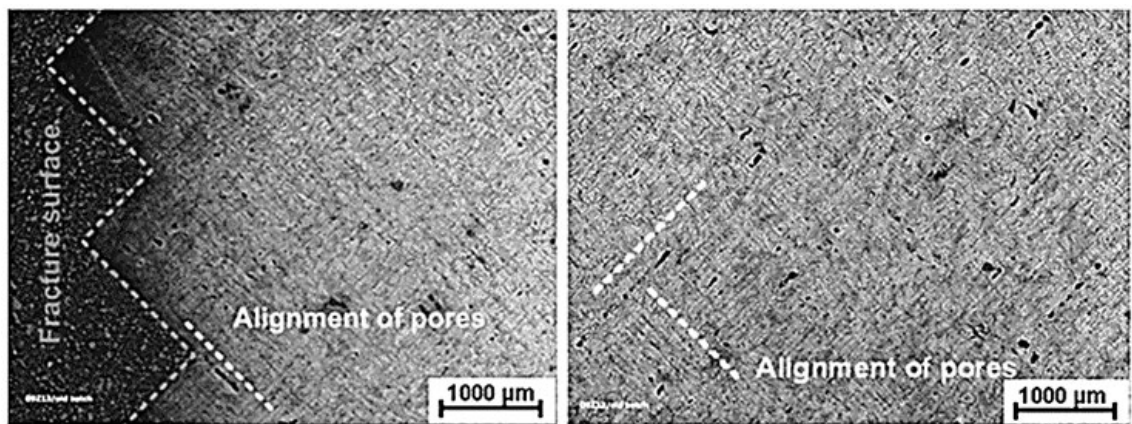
The cross section of Stainless-steel AISI 316L fracture surface which is perpendicular to build direction (Yasa et al., 2010).
